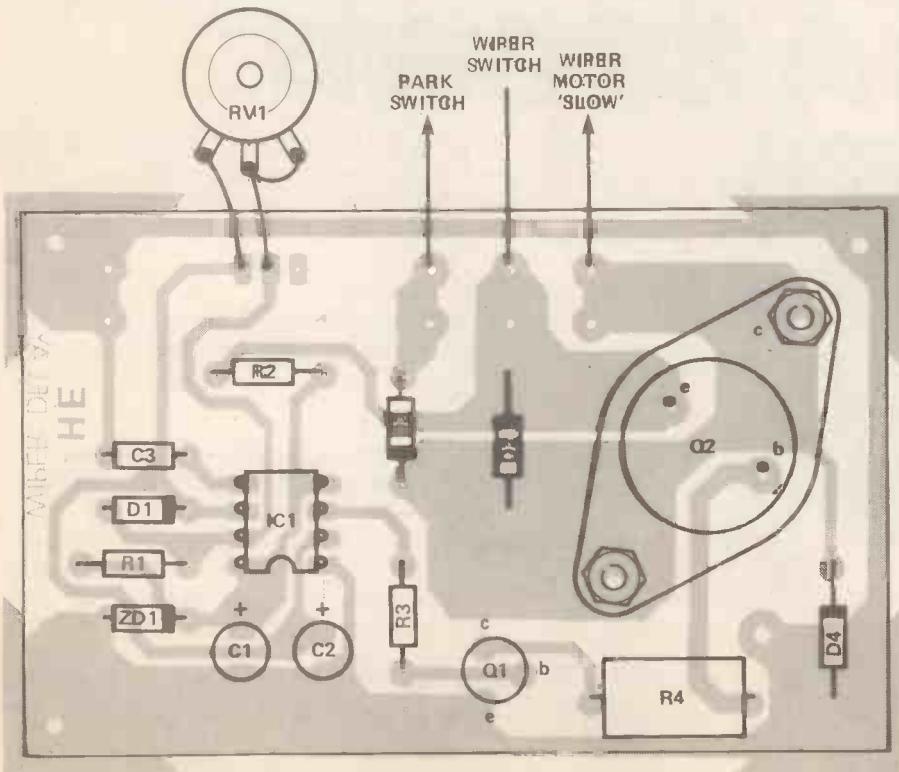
All components are mounted on the PCB except the control potentiometer, which can be mounted on the dashboard or steering column.
